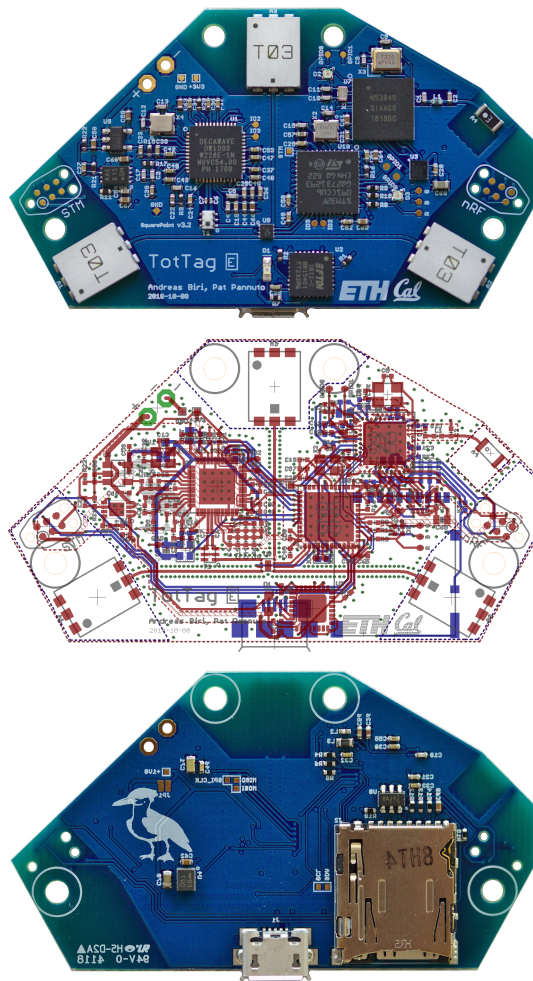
The PCB layout of the TotTag board: the red traces show the top layer of the board, while the blue ones reside on the bottom side.
